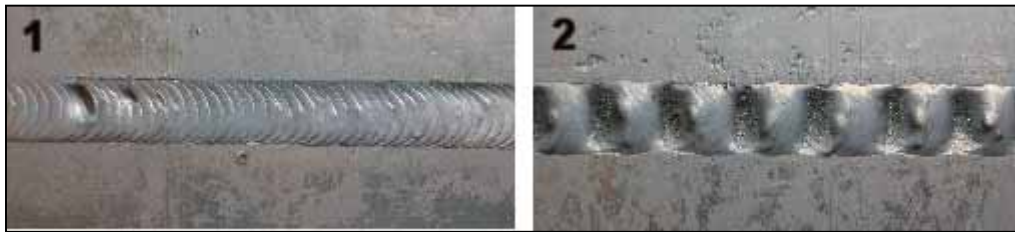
The welds in 25 mm thick copper workpiece. The numbers in Figure refer to Table 5.
